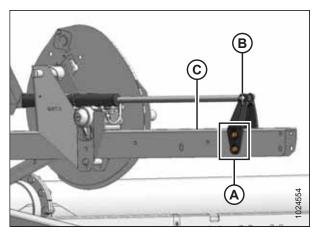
Right Reel Arm Cylinder in Aft Position
